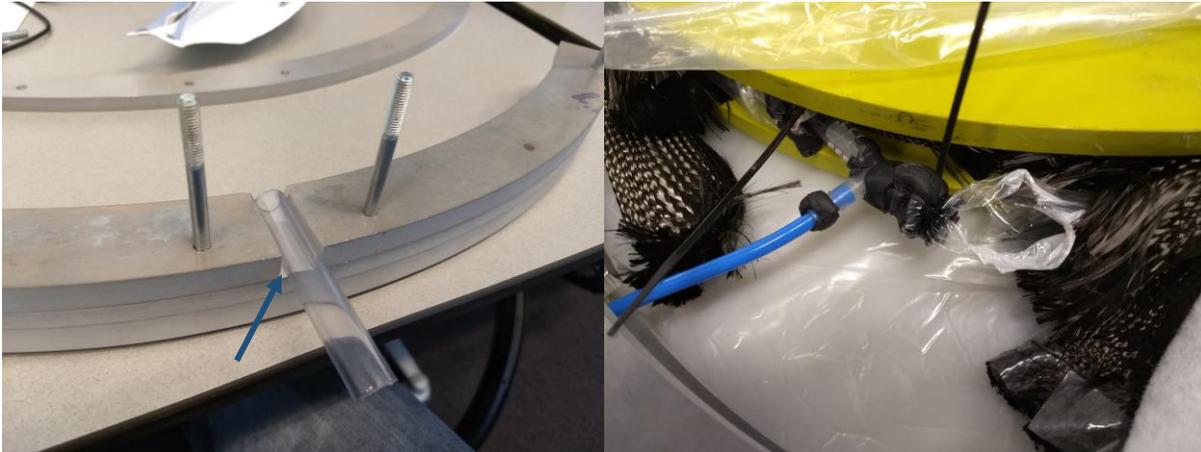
Left: Cut out in the outer mould for the inlet/outlet and the space between the tube and the mould. Right: Exploded bladder when testing the connections for leaks with overpressure.
